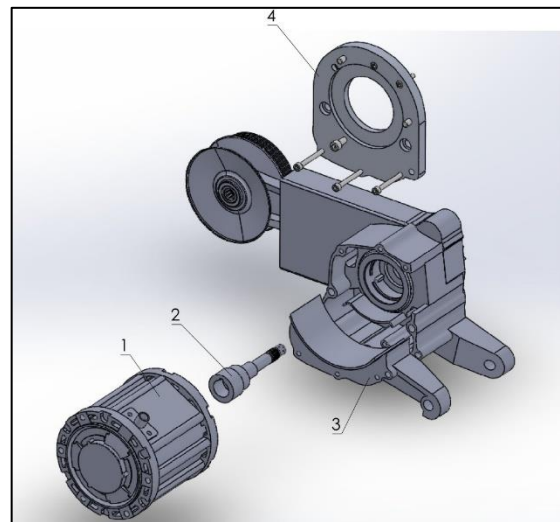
Assembly of mountings and shafts into a convertible two-wheeled motorcycle (1) electric motor, (2) shaft, (3) crankcase, and (4) mounting.
